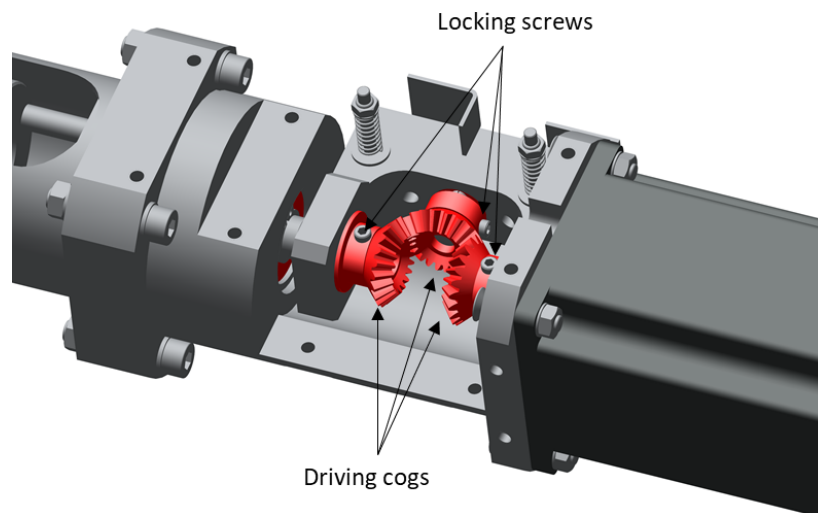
Schematic of the torque limiter with optical sensor removed.
